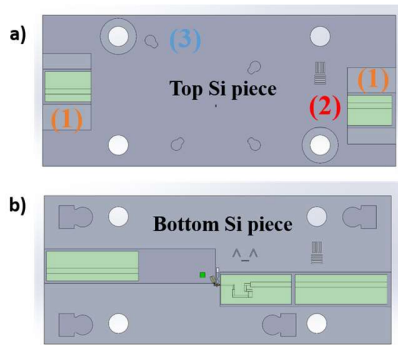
The (a) top and (b) bottom Si pieces, with several places denoted. (1) quartz-based IF boards, (2) indirect monitor of coupling through relative power shifts, and (3) interfaces to block via pins. During assembly, the two pieces are stacked on top of each other.
